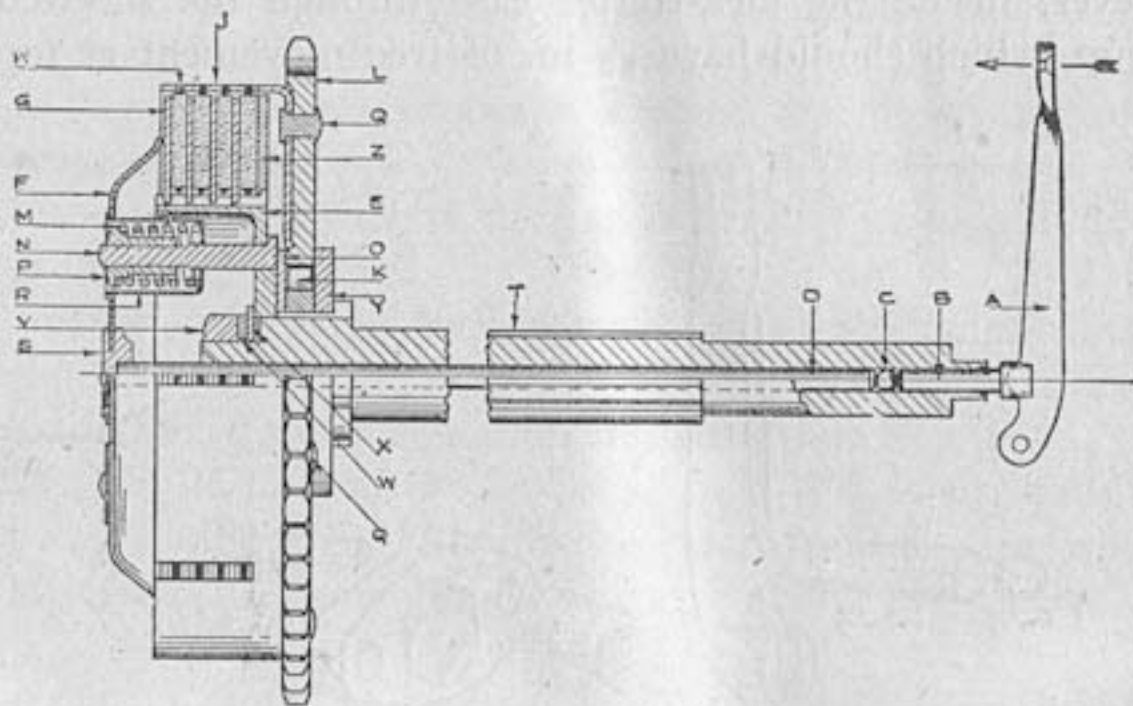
CLUTCH, GEARBOX MAINSHAFT AND CLUTCH-OPERATING MECHANISM.
